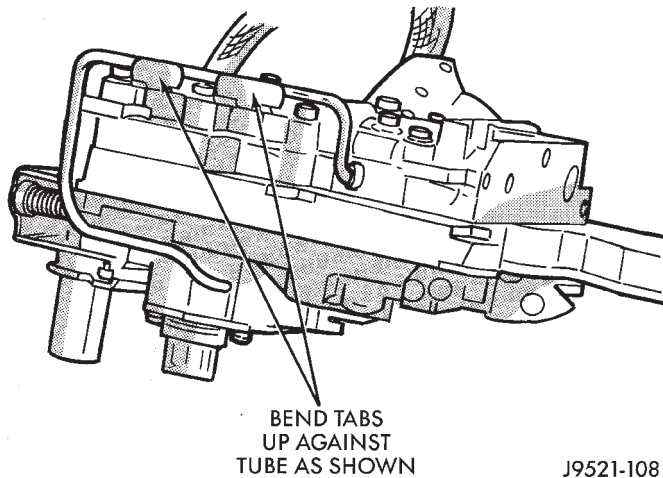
Securing Boost Valve Tube With Brace Tabs
